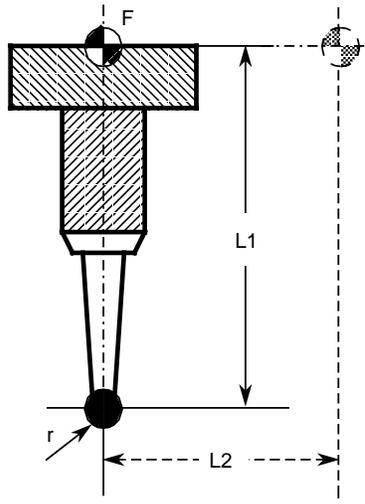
Assignment of workpiece probes in the TOA memory for turning machines
